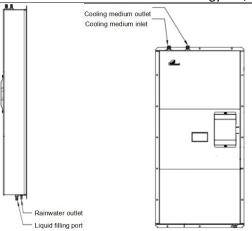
Location of rainwater inlet, liquid replenishment outlet and water inlet and outlet of water chiller
